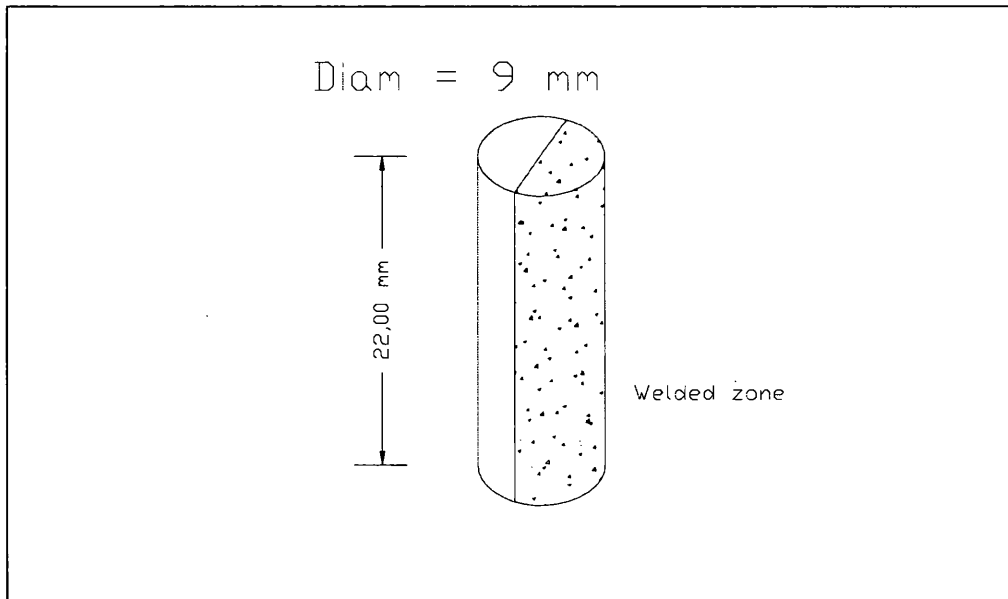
Sketch of the cylinders of type K with weldments.
